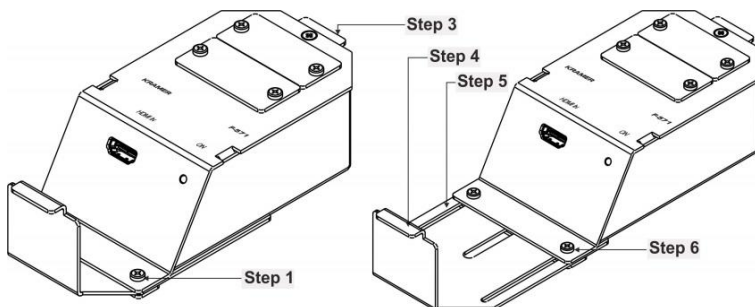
Installing the F-571 (Bettermann) HDMI Line Transmitter Mounting Box
